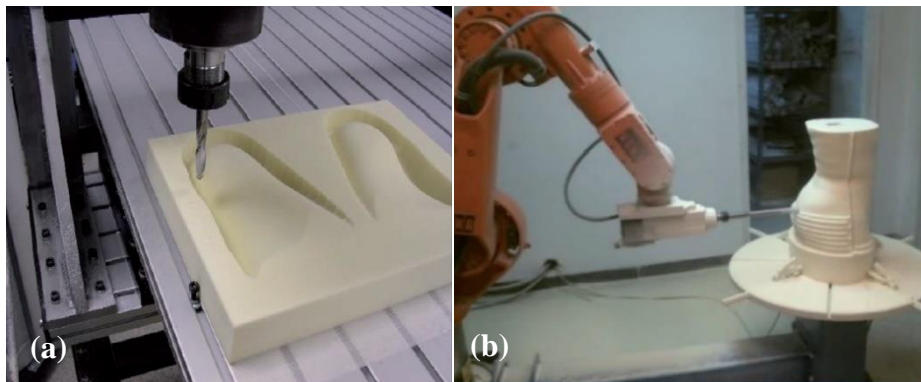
CNC Machining applied in the orthotics field: (a) Moulds for foot orthoses production; and (b) Four-axis milling CNC machine used in a spinal orthosis mould production [178].
